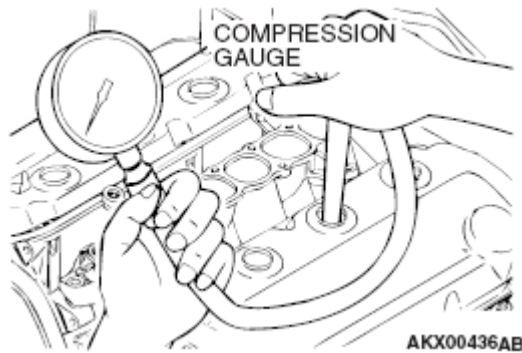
Installing Compression Gauge To Spark Plug Hole
